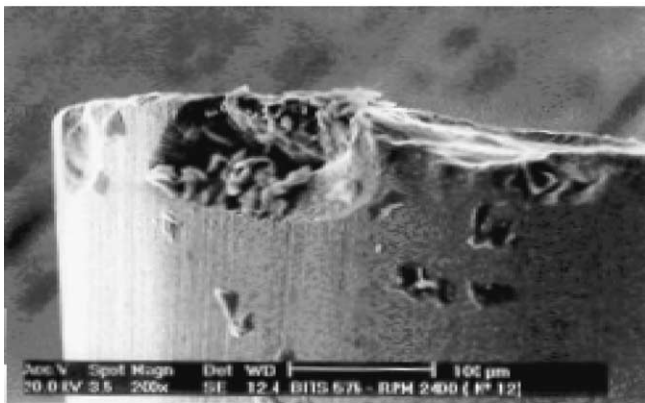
Flank wear and surface finish against machined components for: doc = 0.2 mm, $v_c = 128.61$ m/min and $f = 0.061$ mm/rev.
